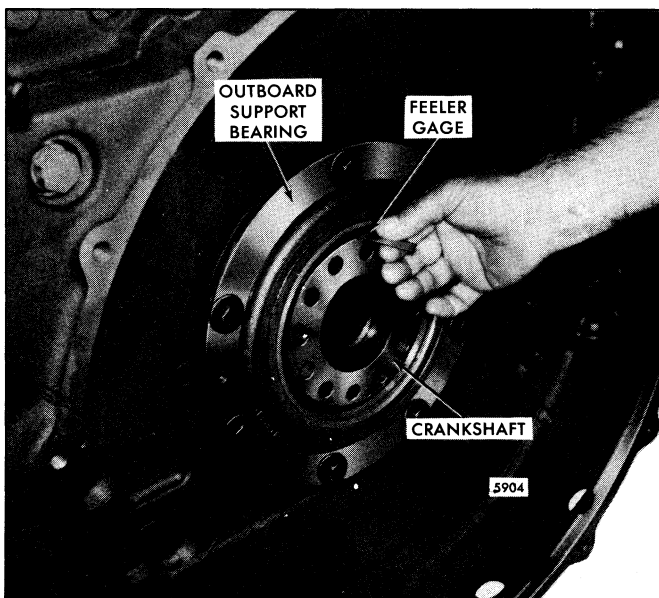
Checking the Clearance Between the Crankshaft and Outboard Bearing
